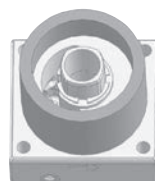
Filter housing (cut-away) with GeoSeal bushing.
